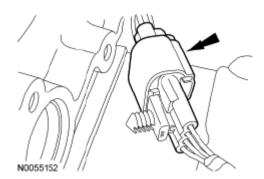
Locating Knock Sensor (KS) Electrical Connector Courtesy of FORD MOTOR CO.
